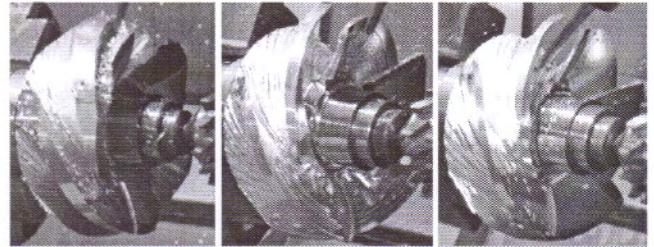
Cutter posture vector sets of the tool path for the hub surface
